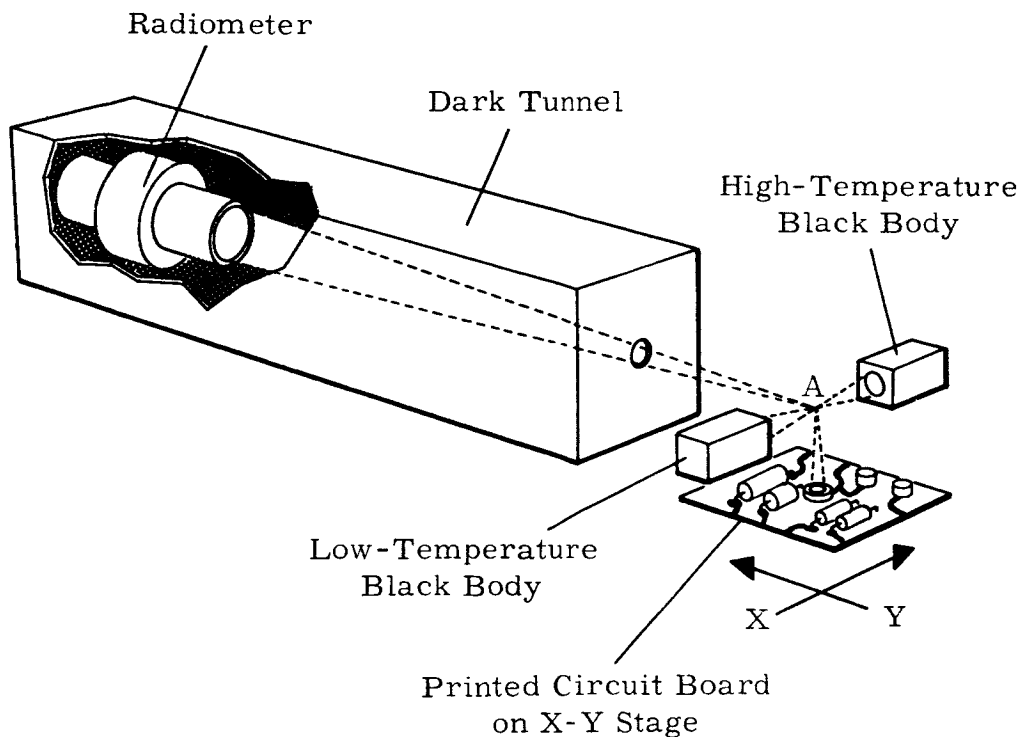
Barnes Radiometer and Martin Designed Fixture Arrangement
